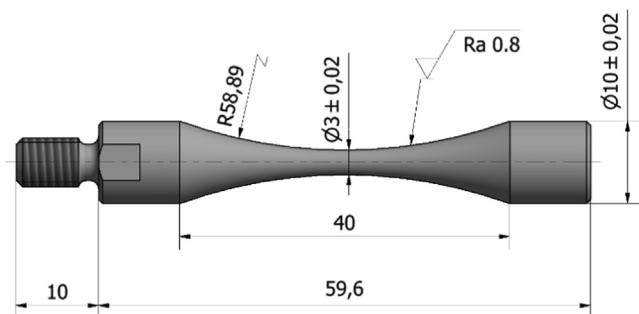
Dimensions (in mm) of the specimens used for testing.
